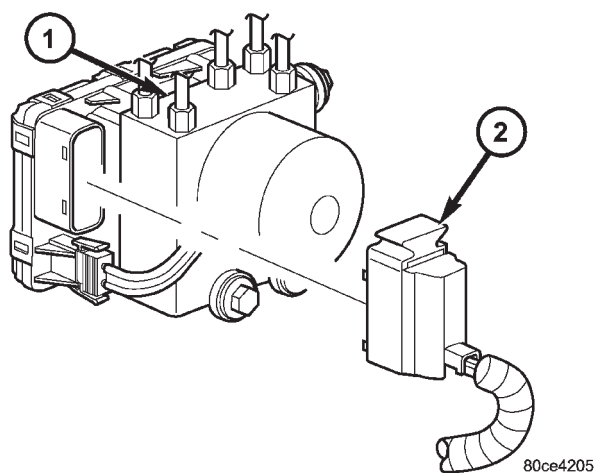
CAB HARNESS CONNECTOR RELEASE
